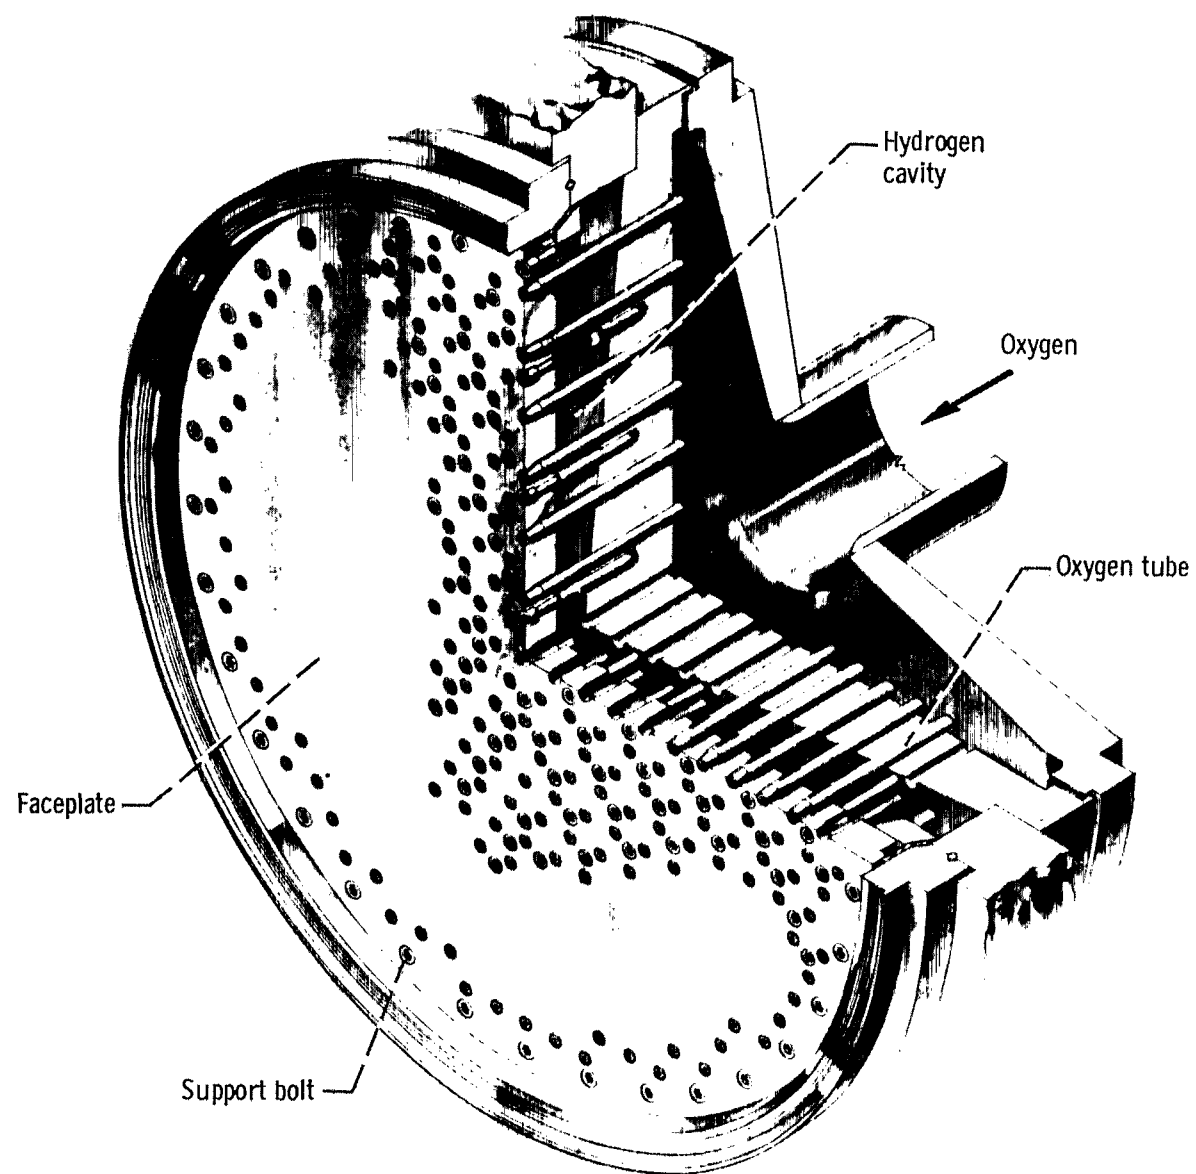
Cutaway view of hydrogen-oxygen engine assembly.
